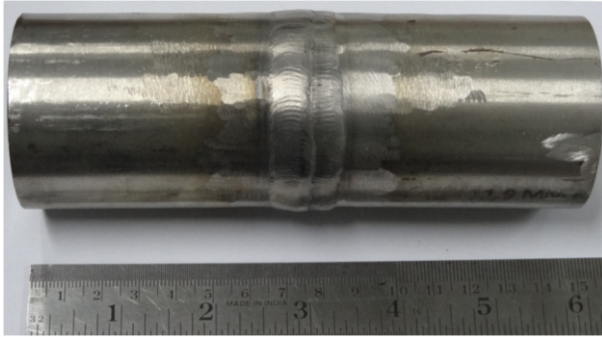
Photograph of a typical Alloy 617M welded tube
